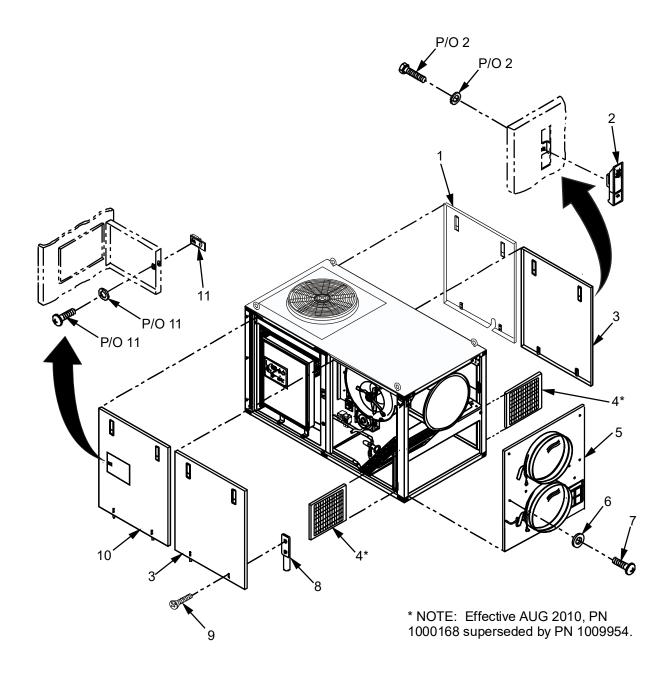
ECU ENCLOSURE ASSEMBLY, 5T, T256250G GREEN, T256250T TAN, (Sheet 1 of 2).
